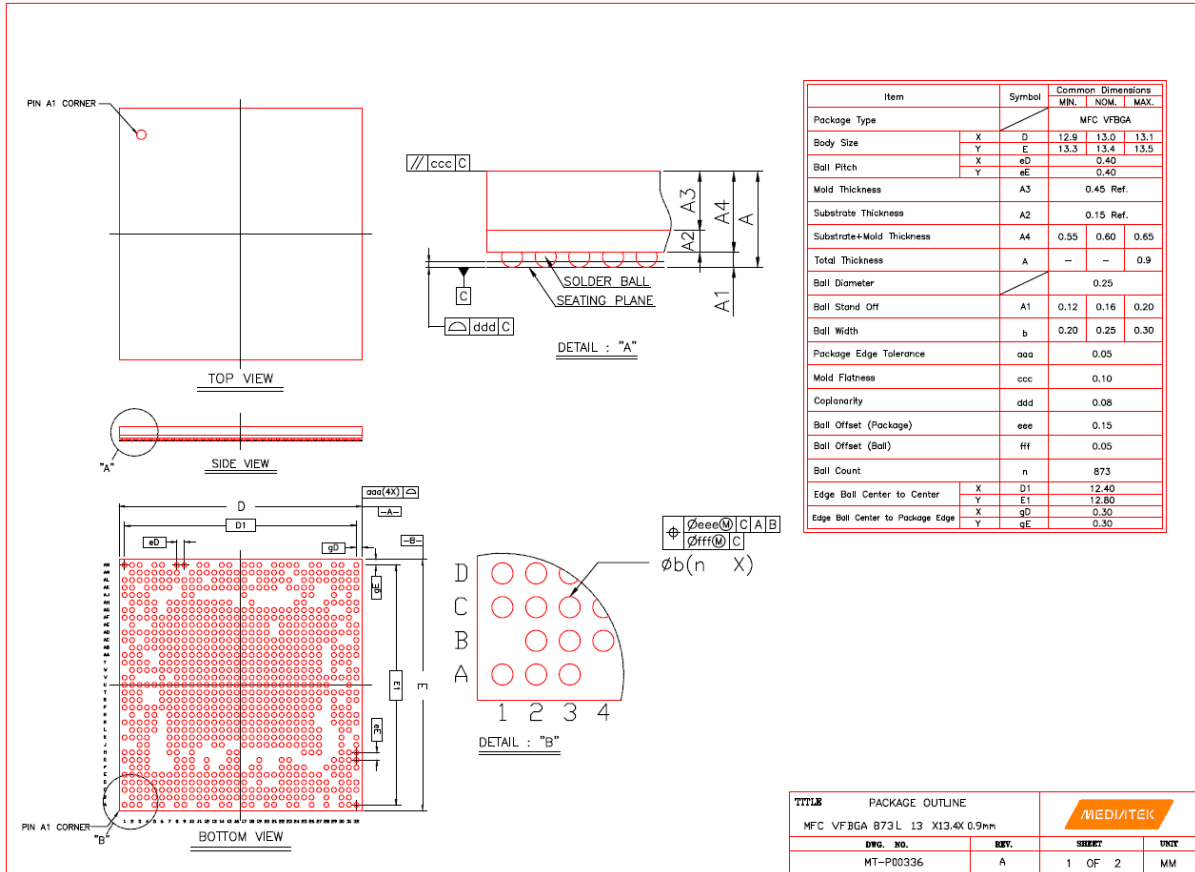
Outlines and dimensions of TFBGA 13mm*13.4mm, 873-ball, 0.4mm pitch package
